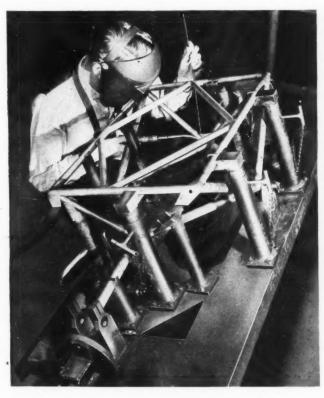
Tubular Engine Mount for a Helicopter being Gas-welded in a Reversible Table Fixture
